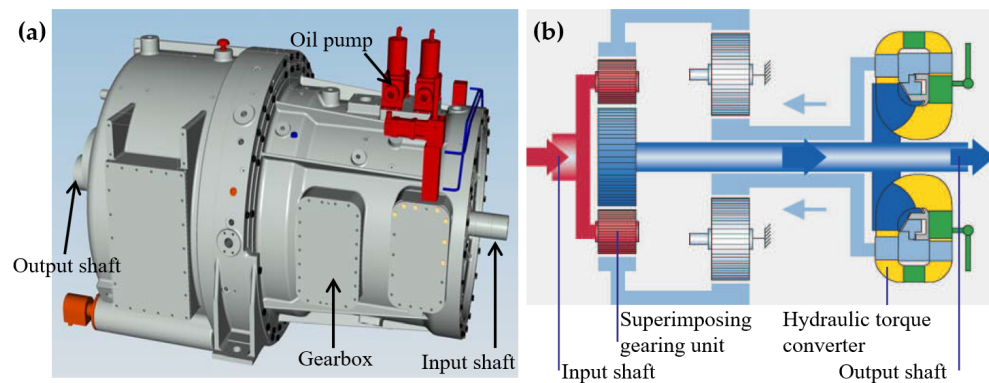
Hydraulic transmission WinDrive [86]: (a) a three-dimensional view and (b) the power flow in WinDrive that consisted of a superimposing gearing unit and a hydrodynamic torque converter.
